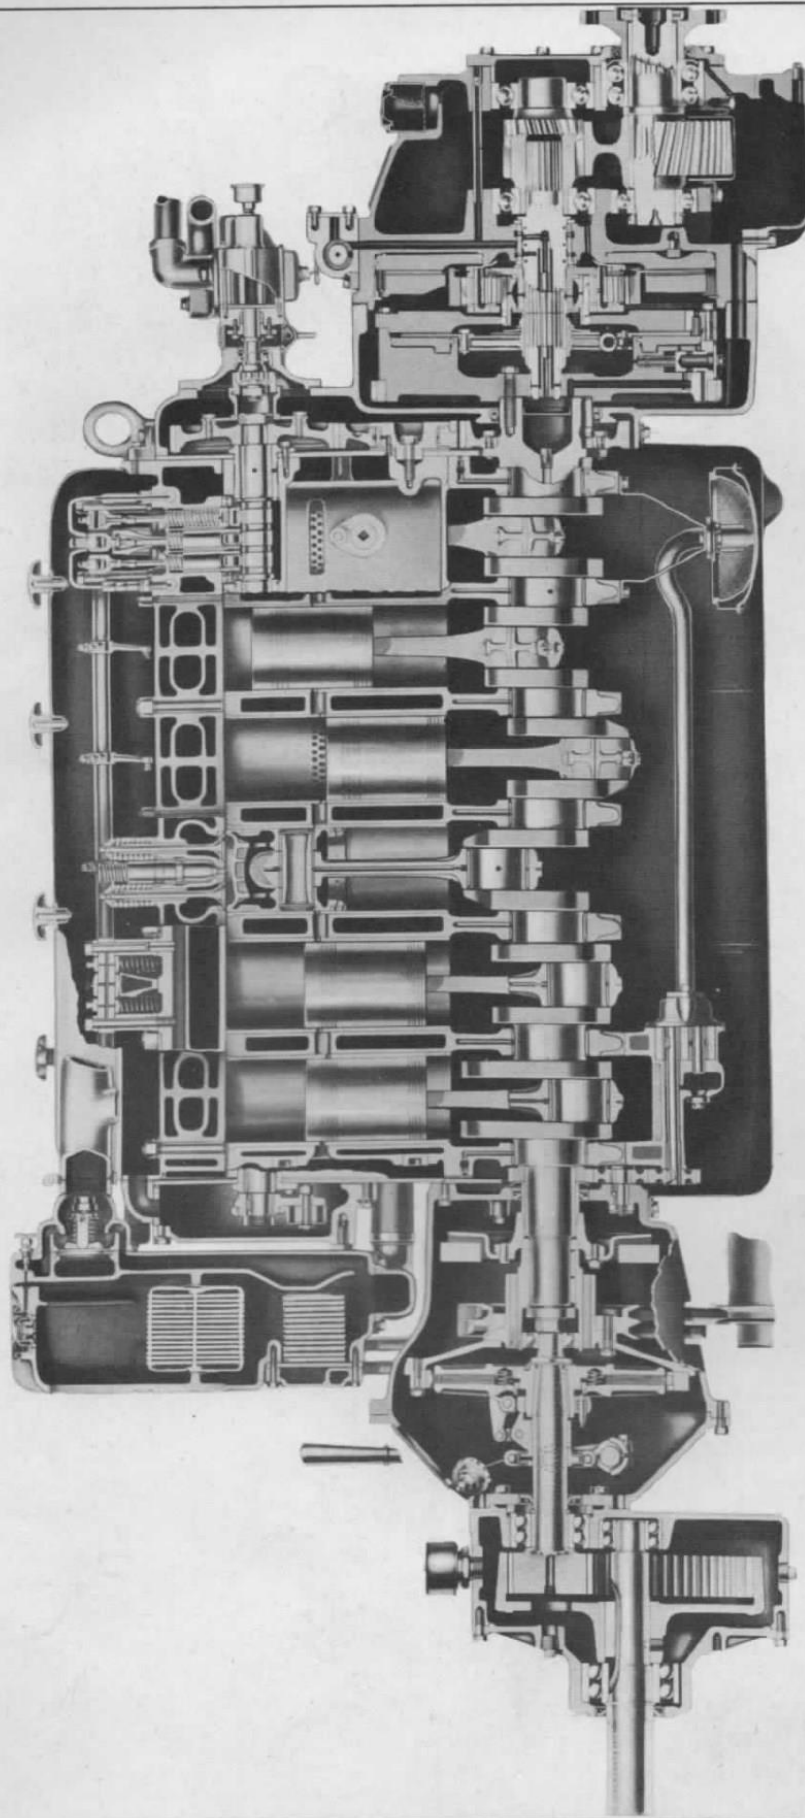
Side Cross Section of Hydraulic Marine Reverse-Reduction Gear Applied to Six-Cylinder, Series 71 Engine
